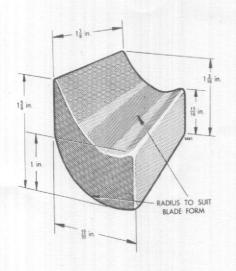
Hard-rubber blocks, to be wedged between adjacent blades to prevent vibration and fretting during peening.
